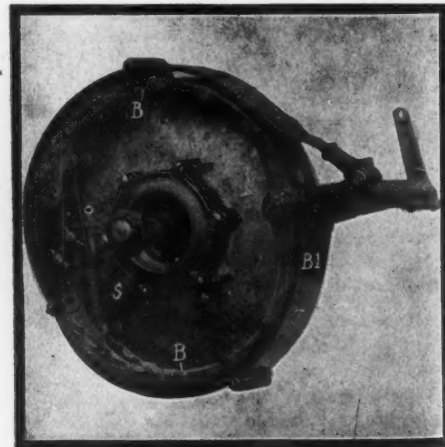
PREMIER INTERNAL BRAKES WITH CORK INSERTS
